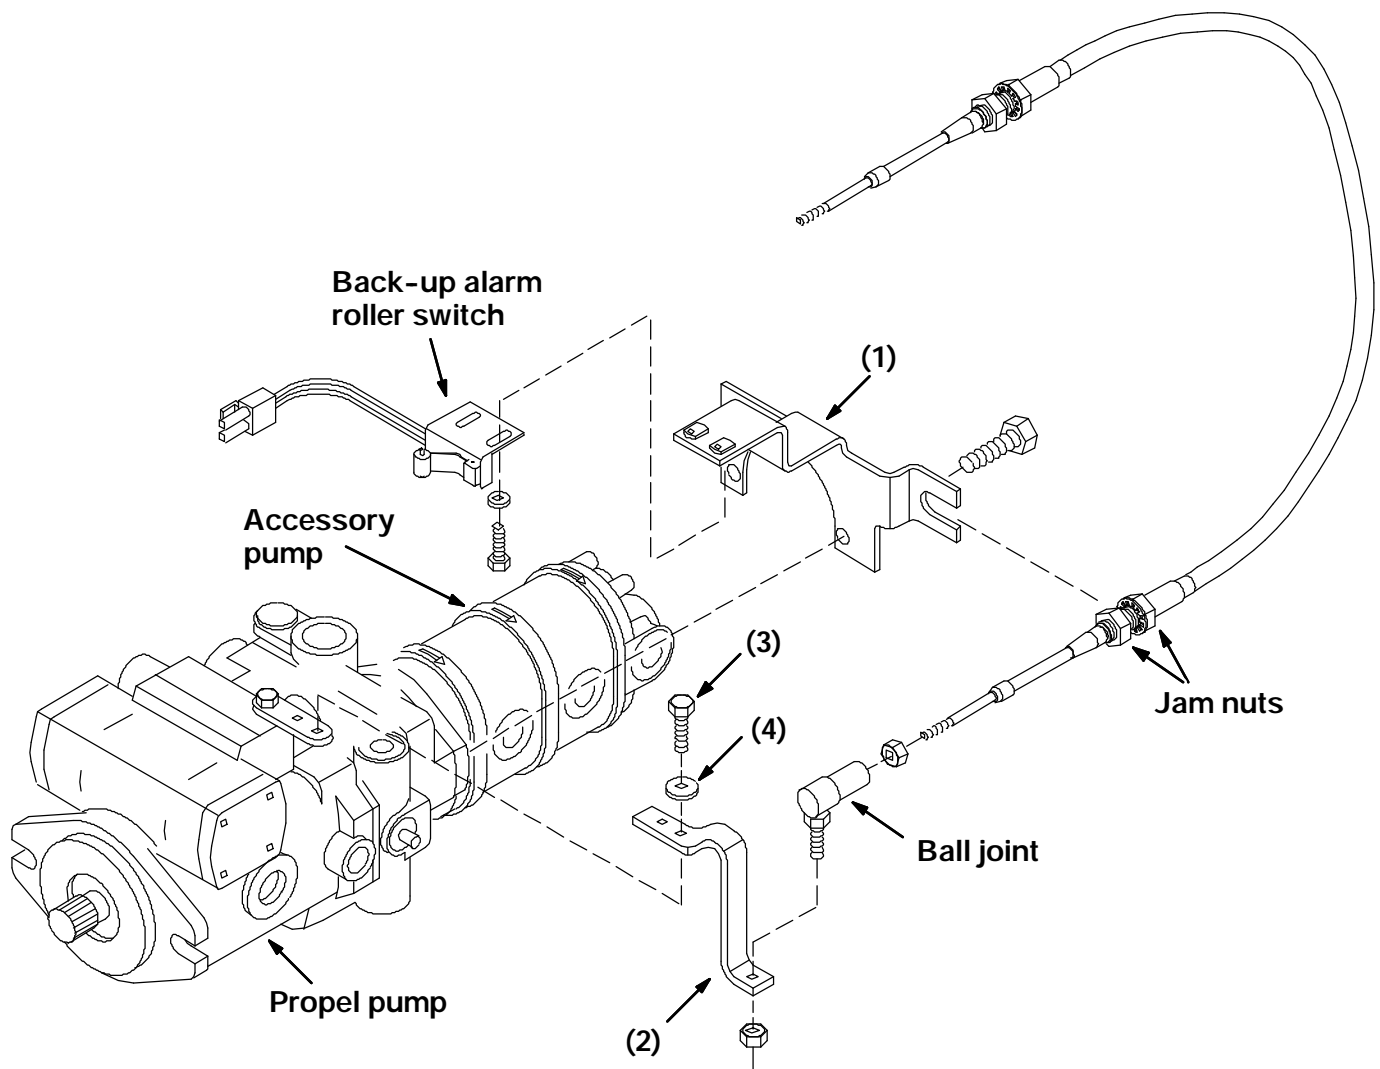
New Propel Cable Mount Bracket And Directional Lever
